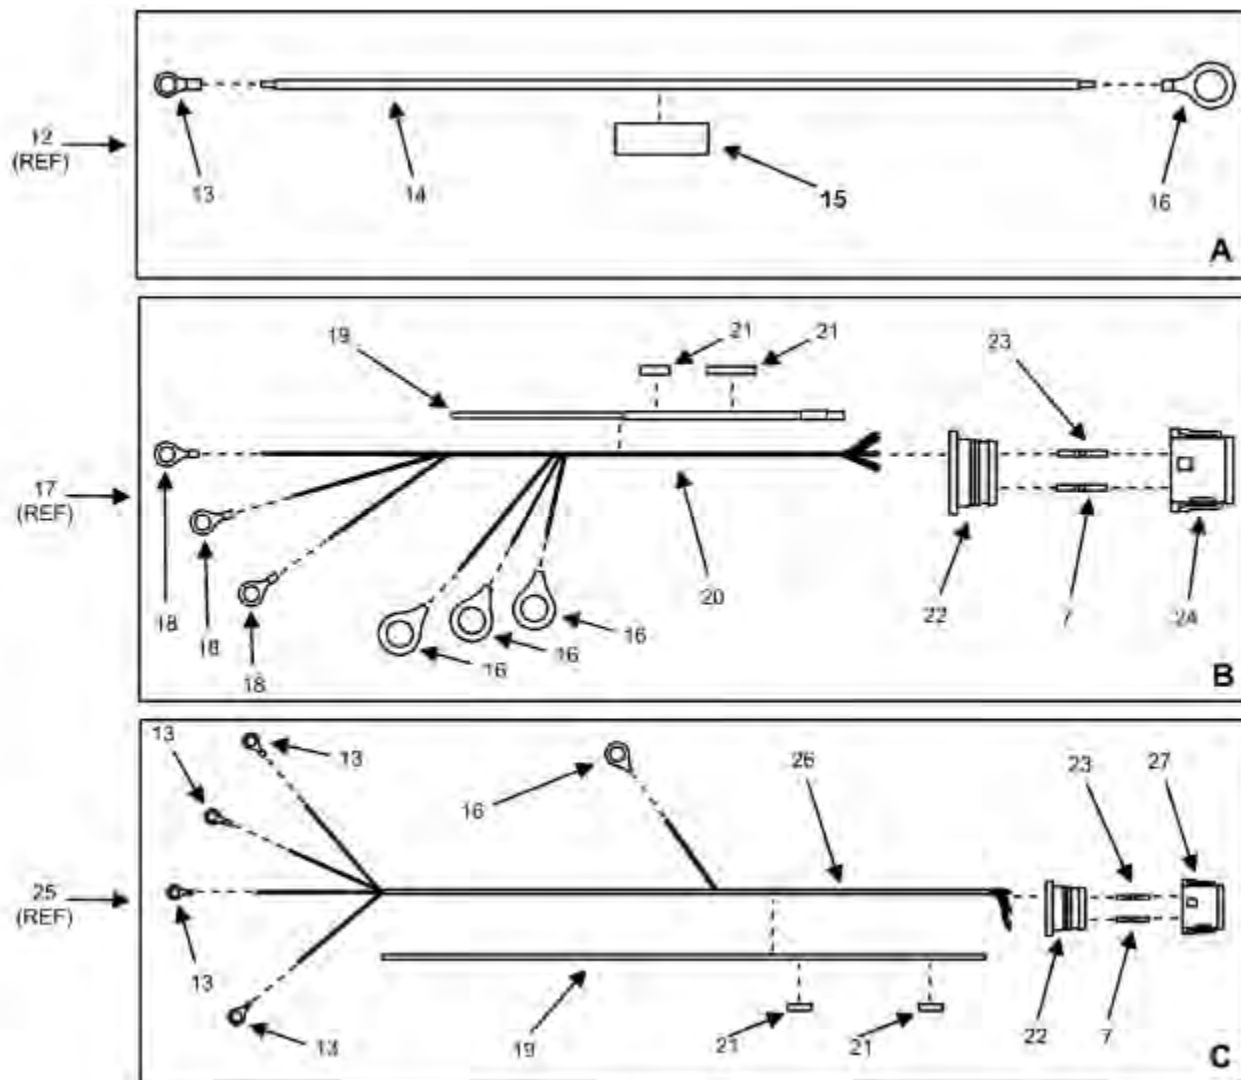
Printed Circuit Board Module (Sheet 3 of 3).
